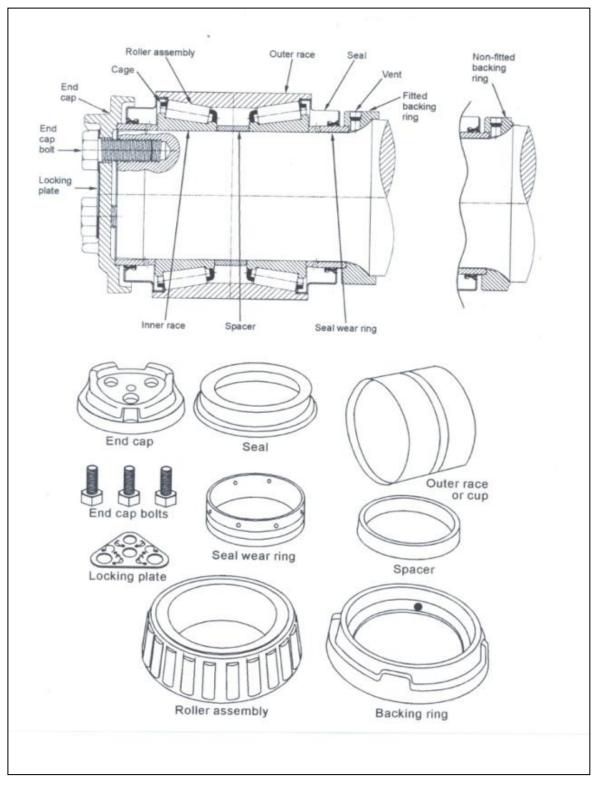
Packaged wheel-bearing components (courtesy of KiwiRail)
